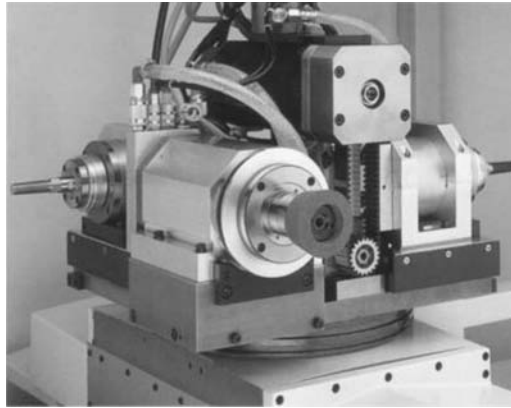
Two-roll internal centerless grinding machine.
